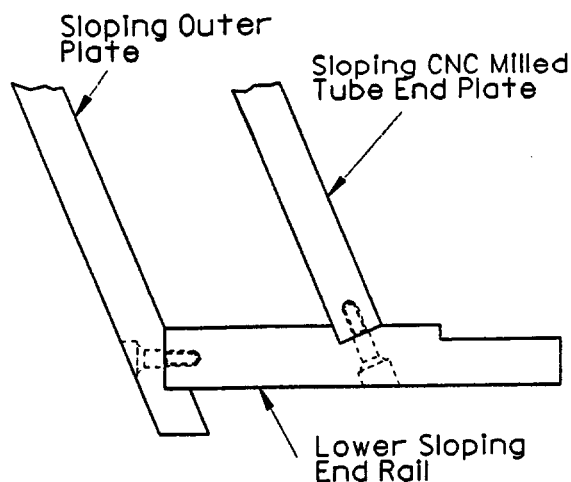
Assembly of the bottom rail to the sloping outer plate and the tube end plate.
